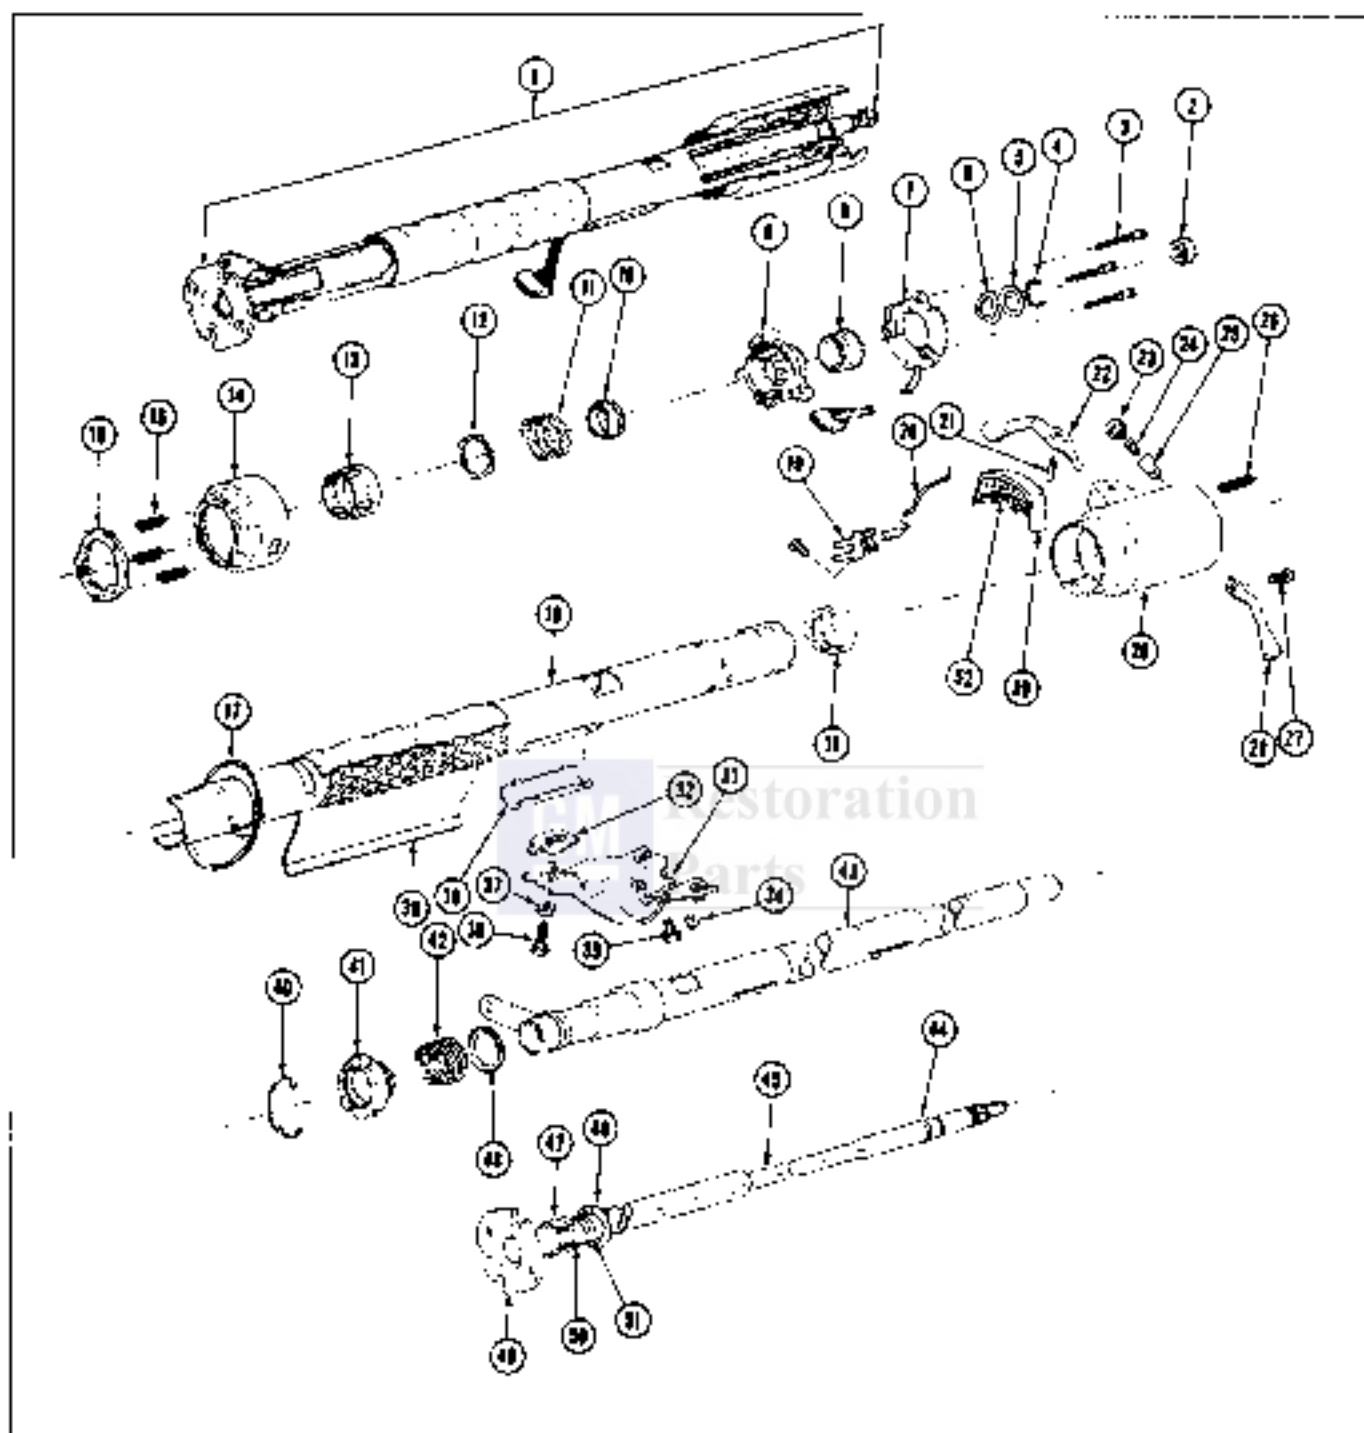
Exploded View of Typical Regular Column - Automatic Transmission
